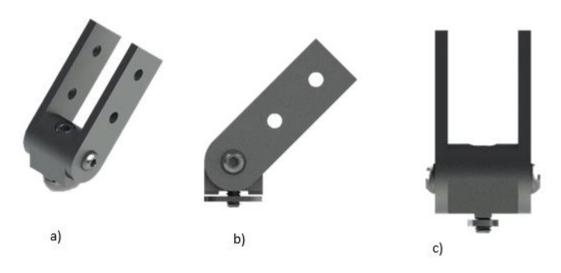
Pivot joint: a) isometric view, b) right plane view, c) front view.
